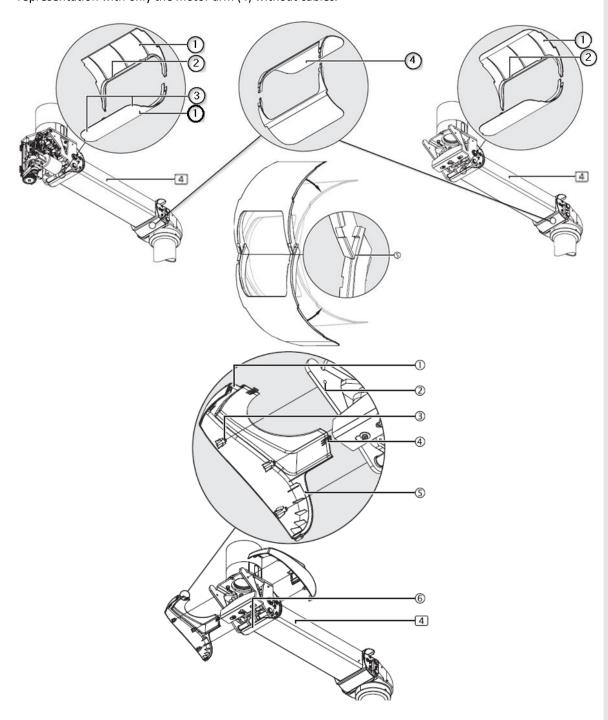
Mounting of the rear side covers on a motor arm (left) or spring arm (right)
